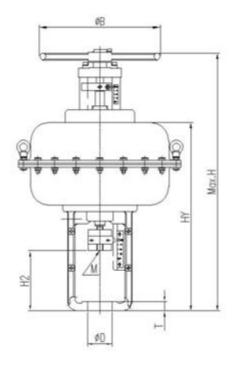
250, 290, 370 Size Diaphragm With Top Steering Handle Wheel Type
